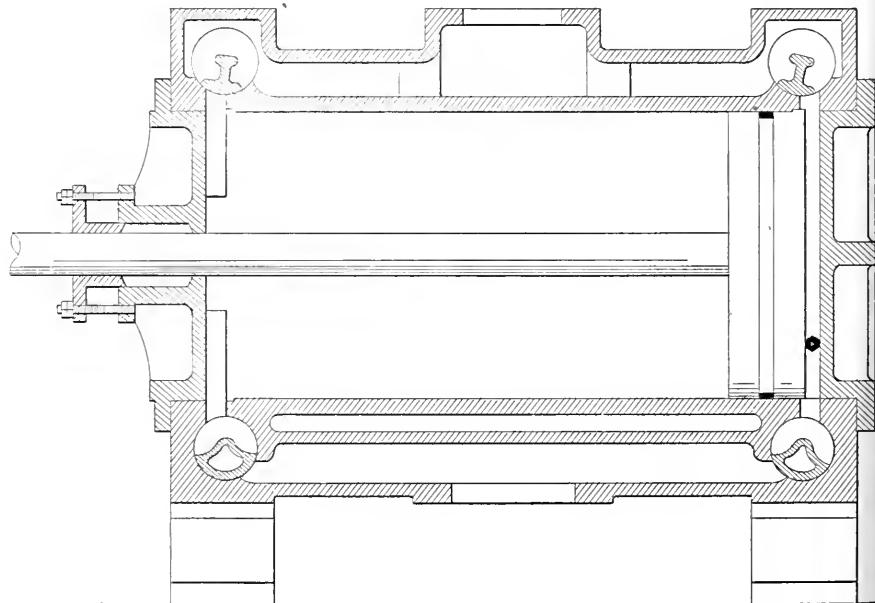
SHOWING WHERE BOLT HEAD LODGED
